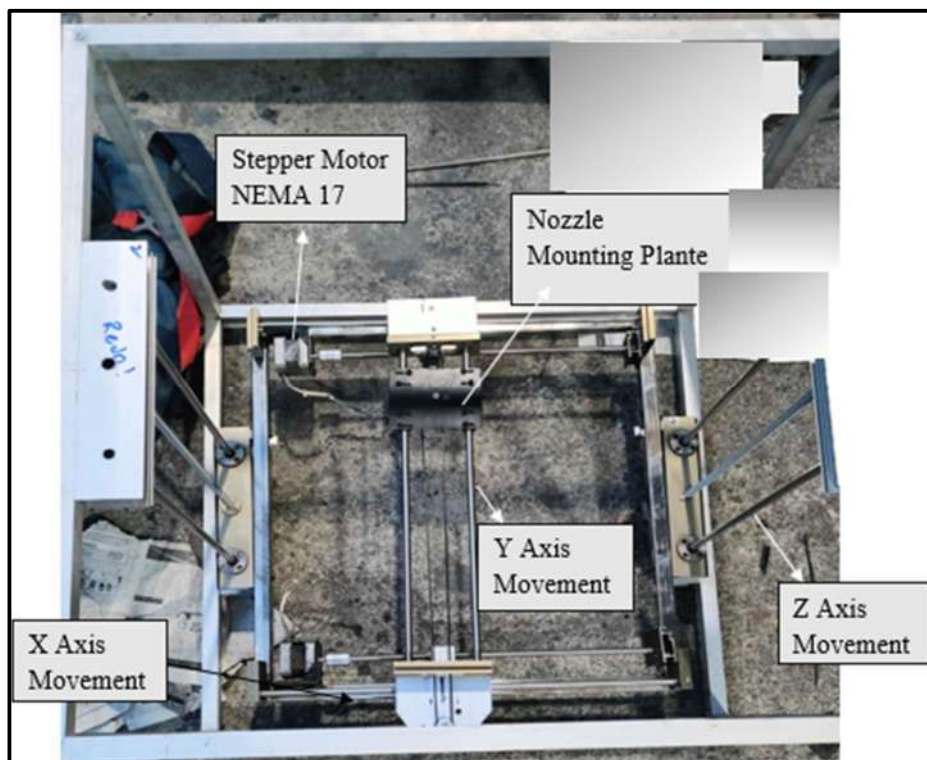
Complete Fabrication of Gantry System Assembled View
